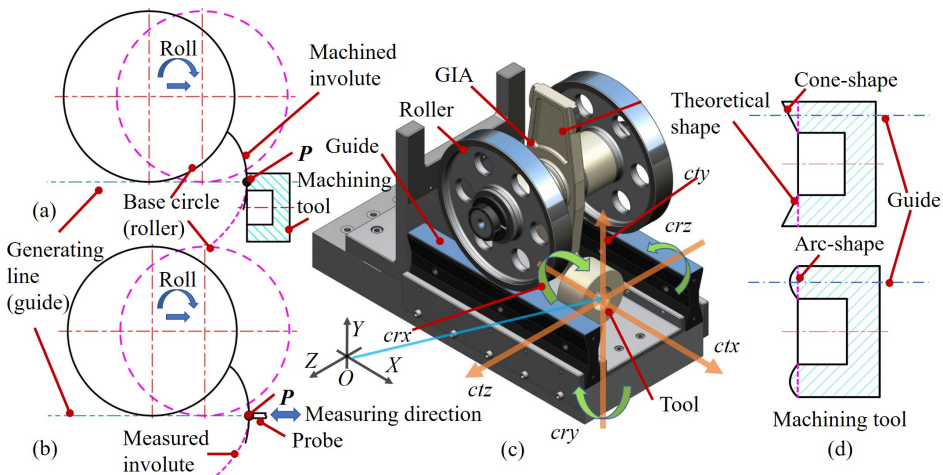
Involute machining and measurement based on rolling generation and errors of the machining tool: (a) Involute machining based on rolling generation; (b) Involute measurement based on rolling generation; (c) 6-DoF errors of the machining tool; (d) Geometric deviations of workface of machining tool.
